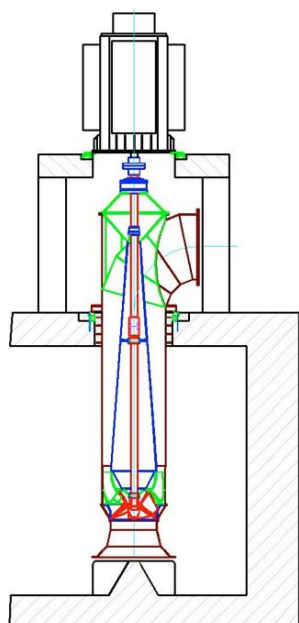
Steel column pipe (Andritz – Vertikale Rohrgehäusepumpen)
